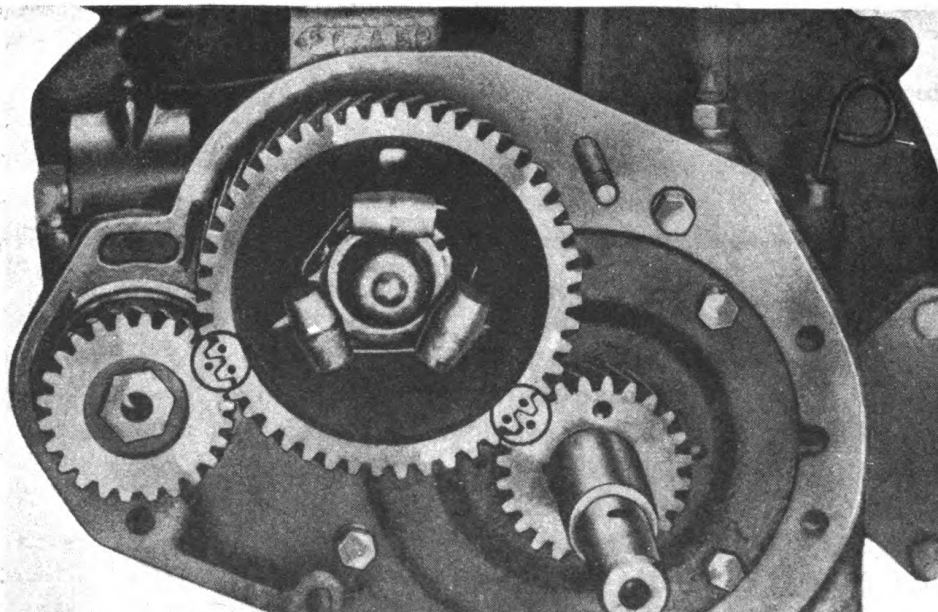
Crankshaft pinion, cam gear, and magneto timing marks.
